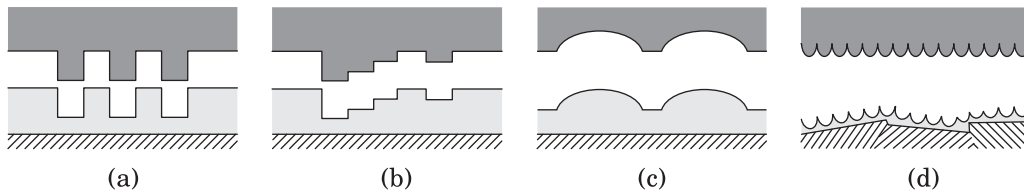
Various types of nanoimprint molds: (a) 2D classical mold (b) 3D multi-level mold (c) 3D smooth mold (d) Soft mold.
